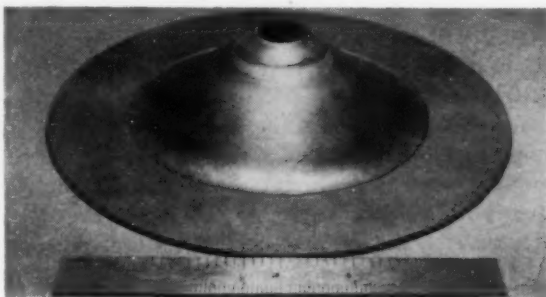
A self-formed cone may be made directly from a flat sheet. A single roller bears against a work blank.
